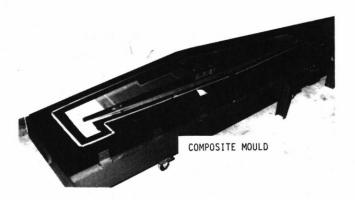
PC-9 ELEVATOR DESIGN AND TOOLING
